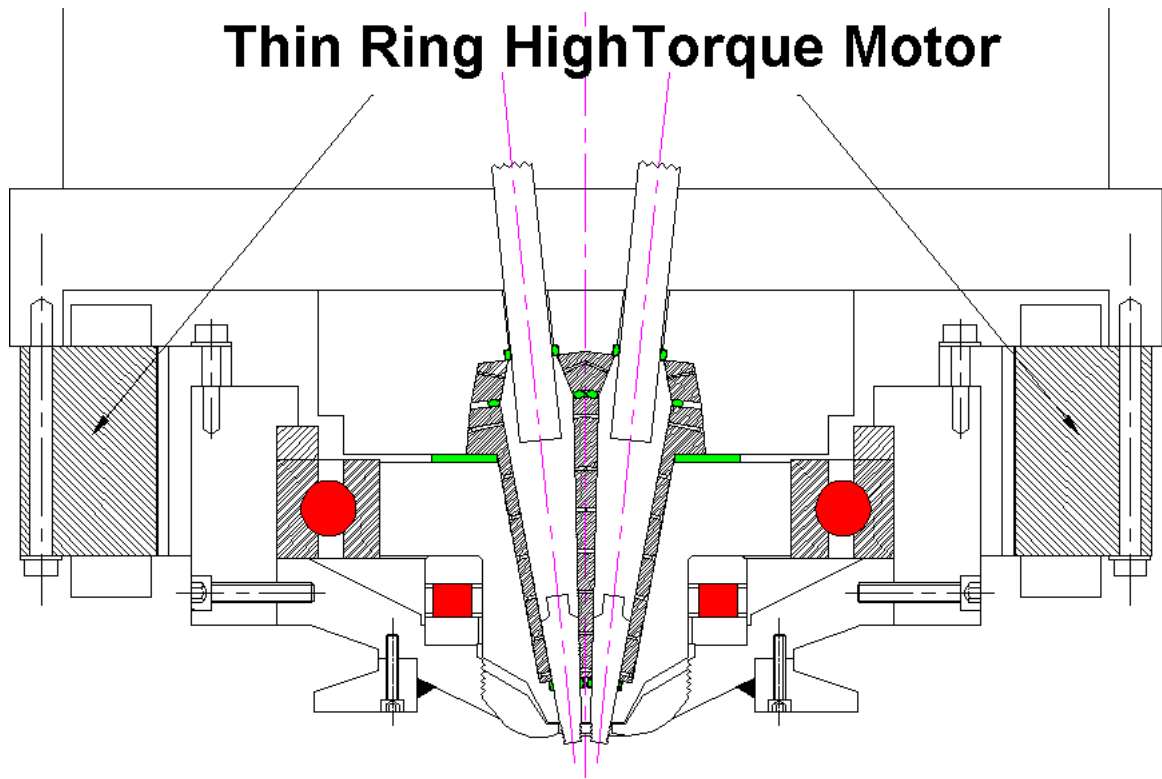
Thin ring high torque motor to be used to drive the shoulder.
